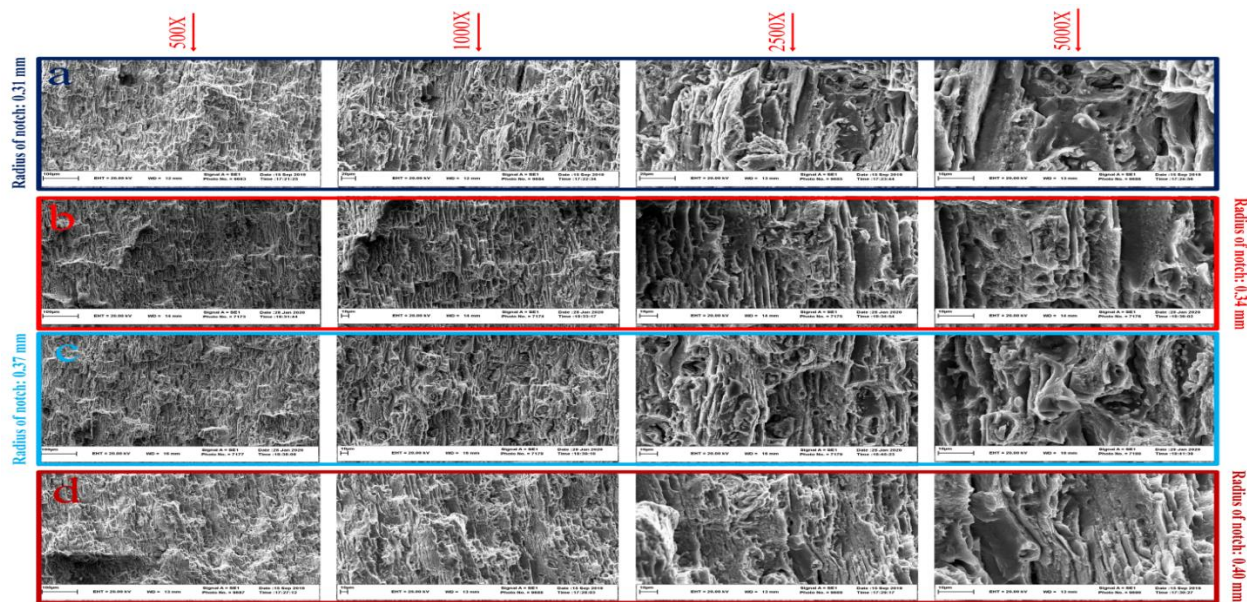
Fracture surfaces for tasted samples (range from 0.31 to 0.40 mm).
